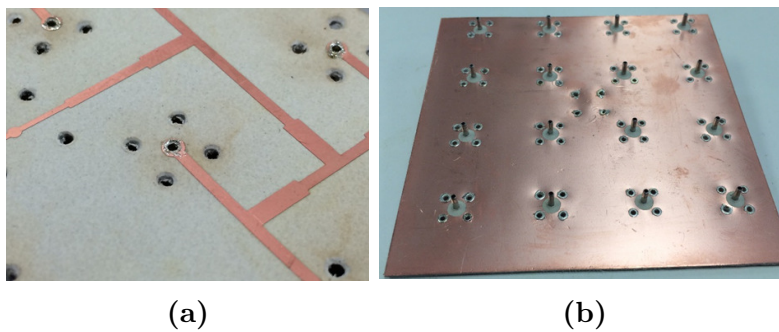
Attaching and soldering the 16 216 mil vias with the head attached on layer 4.
